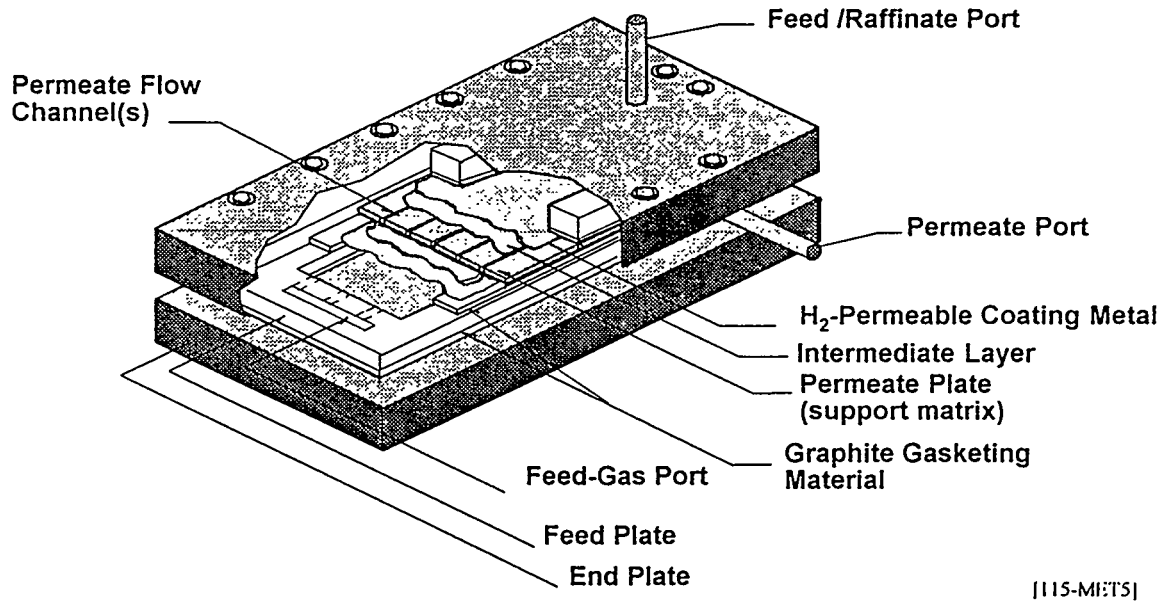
Cutaway View of a Prototype Plate-and-Frame Membrane Module
